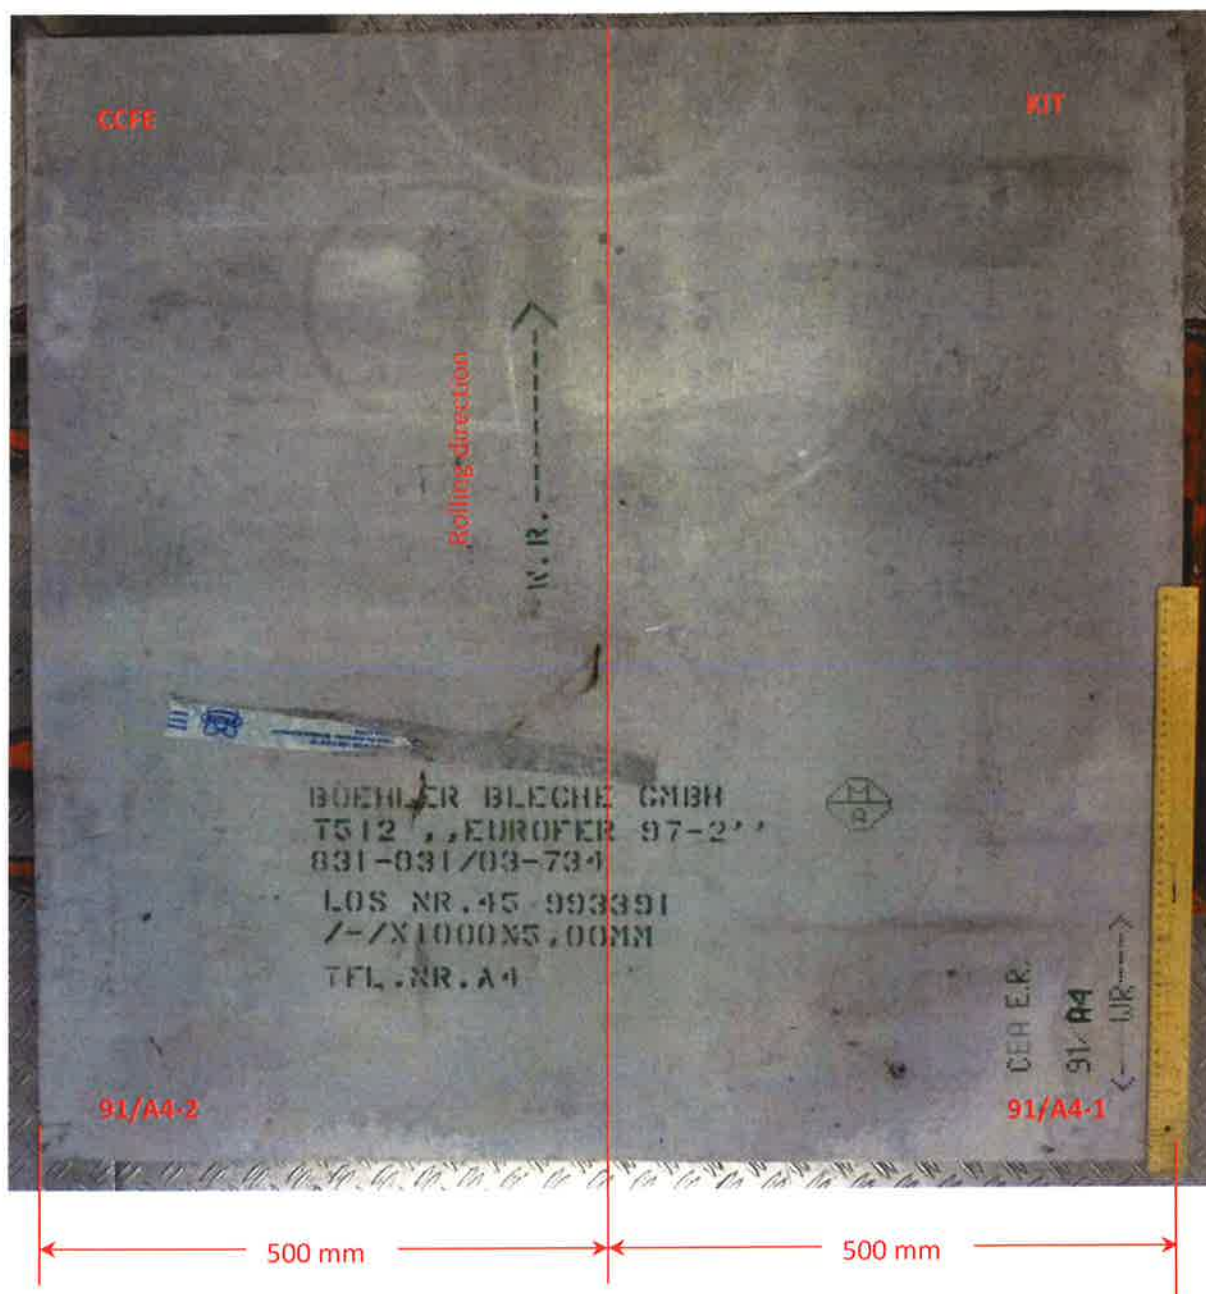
1000 mm cut into 2 pieces 500x1000 mm
